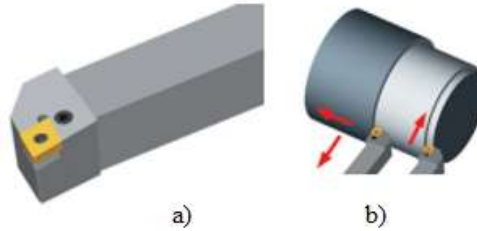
a) Cutting tool [12,23], b) Toolpath precision in CNC turning [23]
